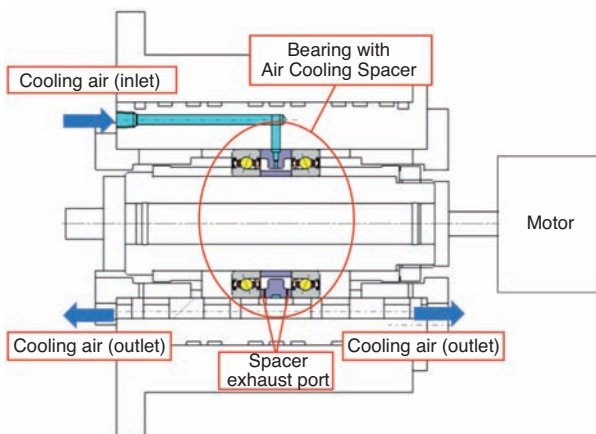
Structure of test spindle (grease lubricated air cooling spacer)
